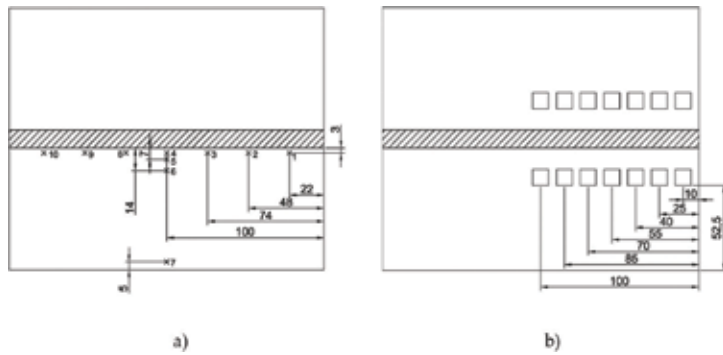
Position of the thermocouples (a) and (b) position of the hole-drilling gauges in the butt weld.
